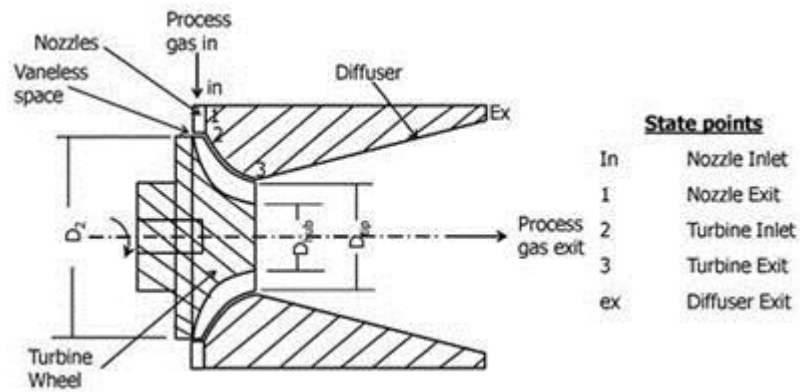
State points at nozzles, turbine wheel and diffuser
